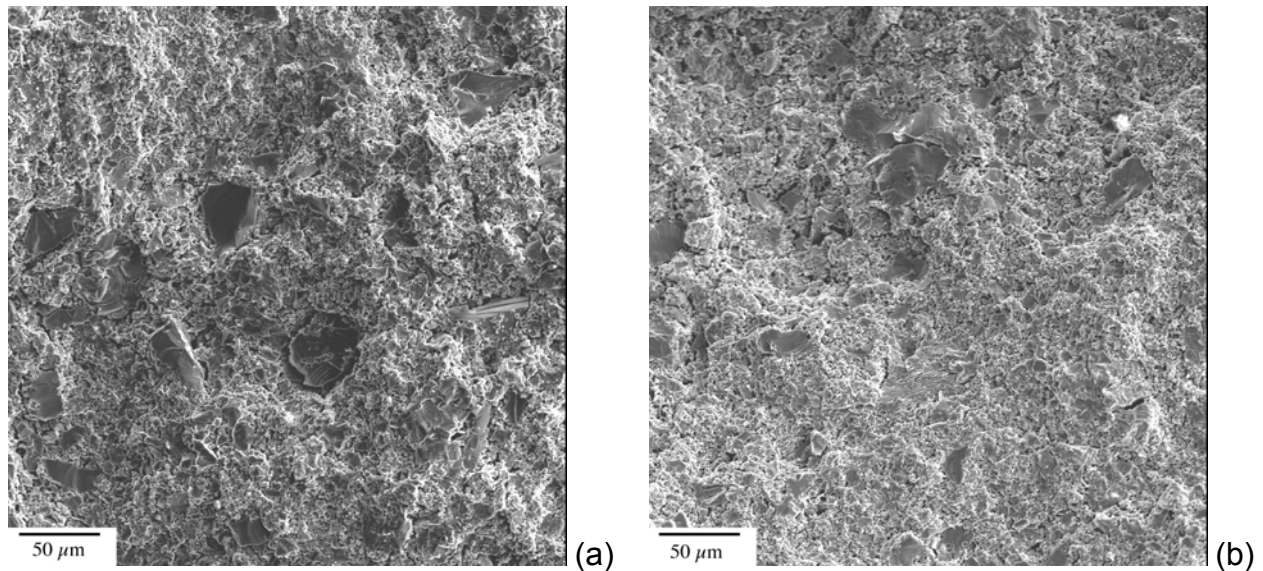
Typical fracture surfaces for heat treated samples. (a) radial plane; (b) longitudinal plane.
